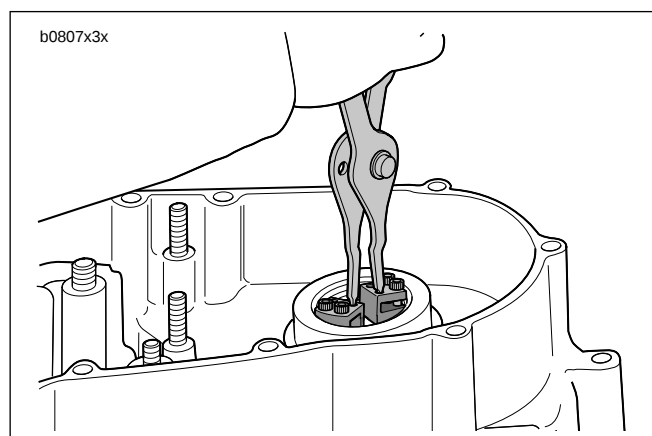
Remove Snap-Ring From Crankcase Bore
